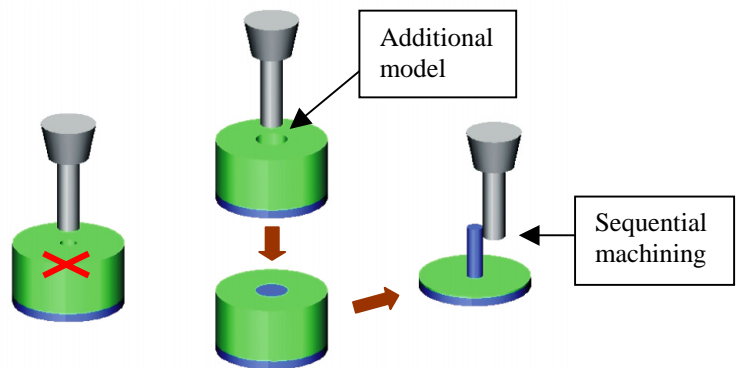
Additional model and sequential machining for the shaft smaller than the minimum available cutter.
